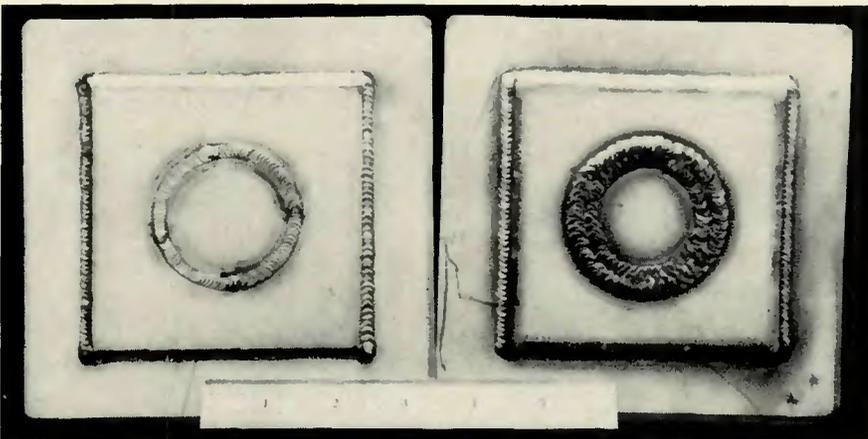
Restrained weld patch specimens, 0.070 in. (1.78 mm) and 0.187 in. (4.75 mm) thick are shown at left and right, respectively
